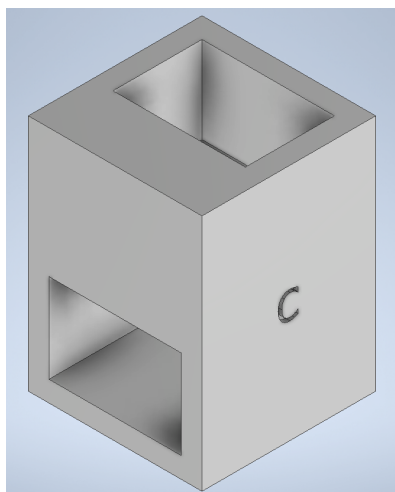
Isometric view one the two parts of the holder for the scintillators
